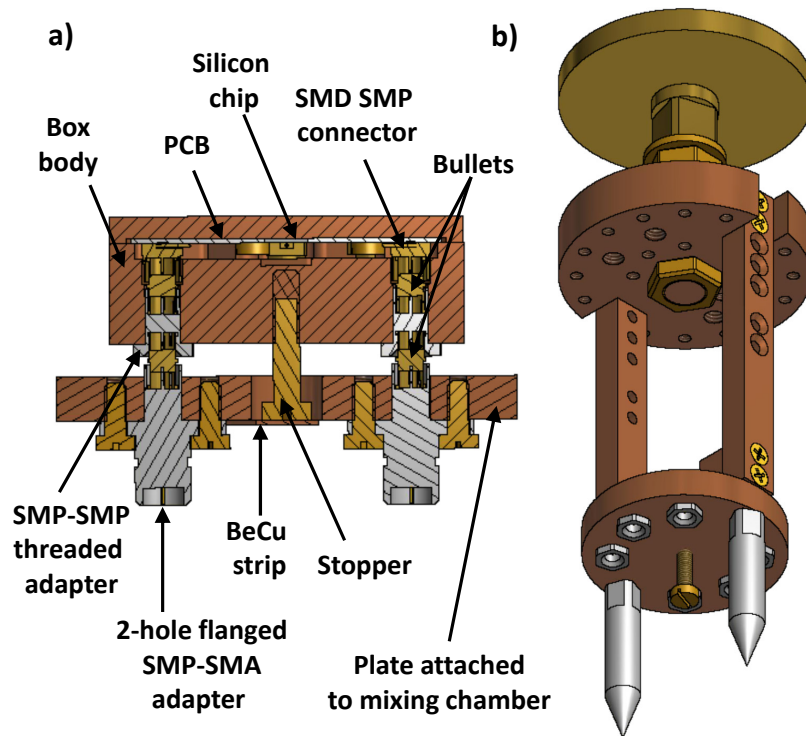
Interfacing between insertable devices and the microwave setup. a) Close-up section of the interconnected part of the setup presented on Fig. 4.2, in the situation where top and bottom assemblies mate. b) Alternative to assembly used to connect sample holders not specifically designed to be mated directly onto the bottom assembly.
